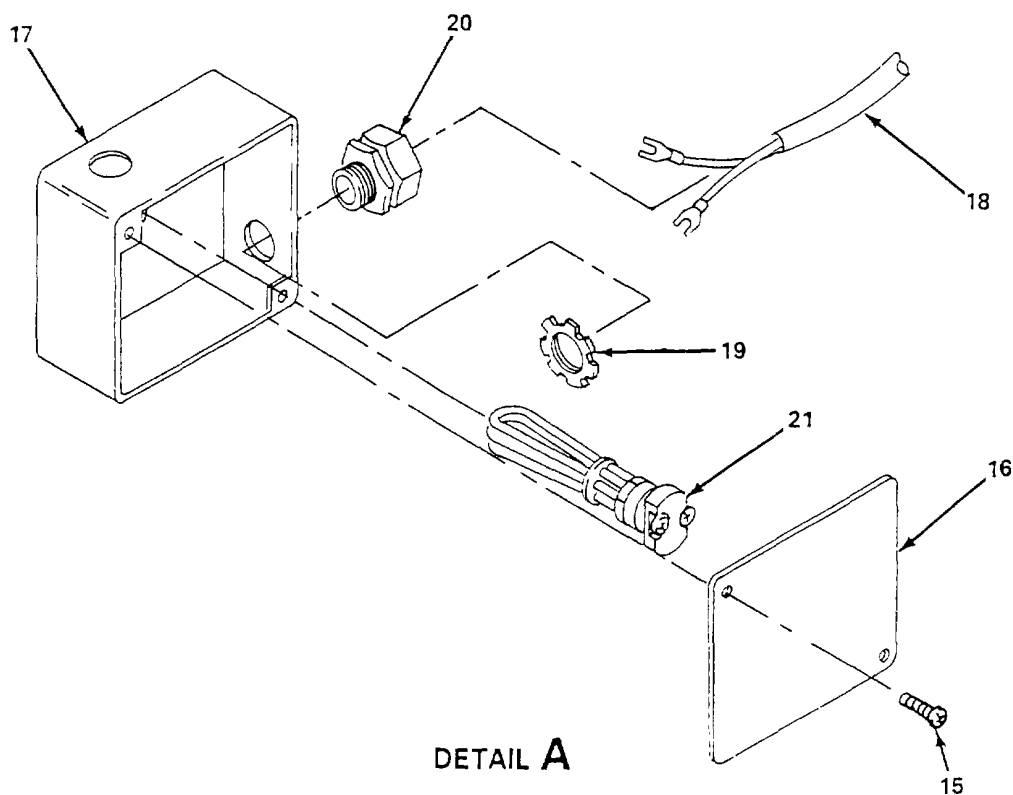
Heater/Chiller Module, Repair (Sheet 2 of 3).
